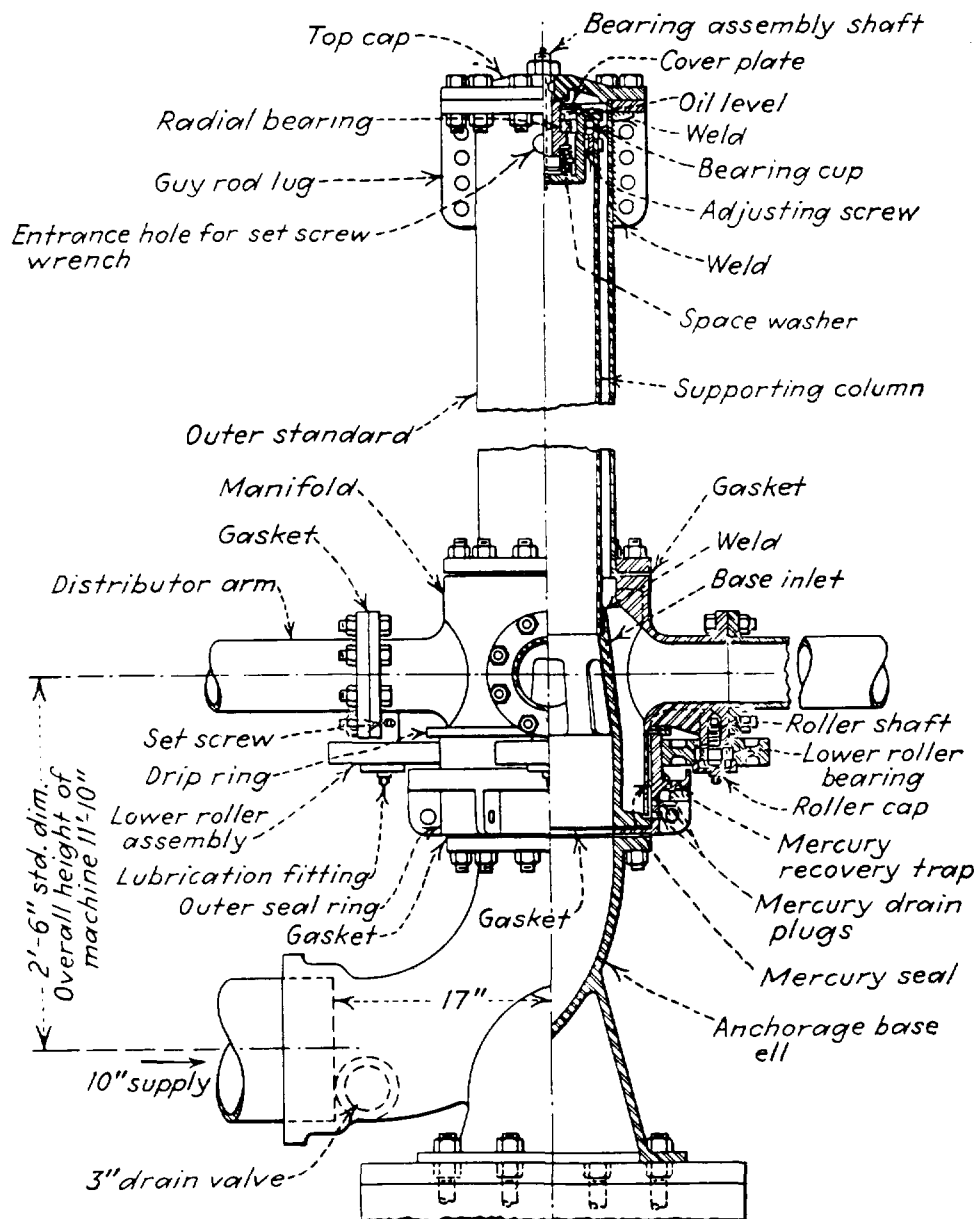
Details of riser pipe and connection to rotating arms. (Courtesy Pacific Flush Tank Company.)
